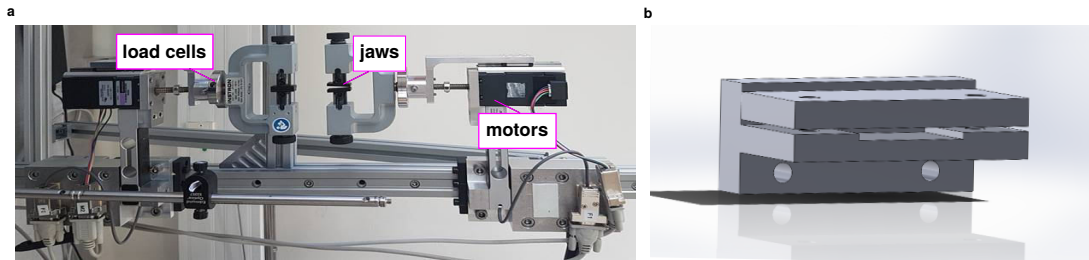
a, Setup for uniaxial tension tests. b, Solidworks 3D CAD design of the 3D-printed jaws.
